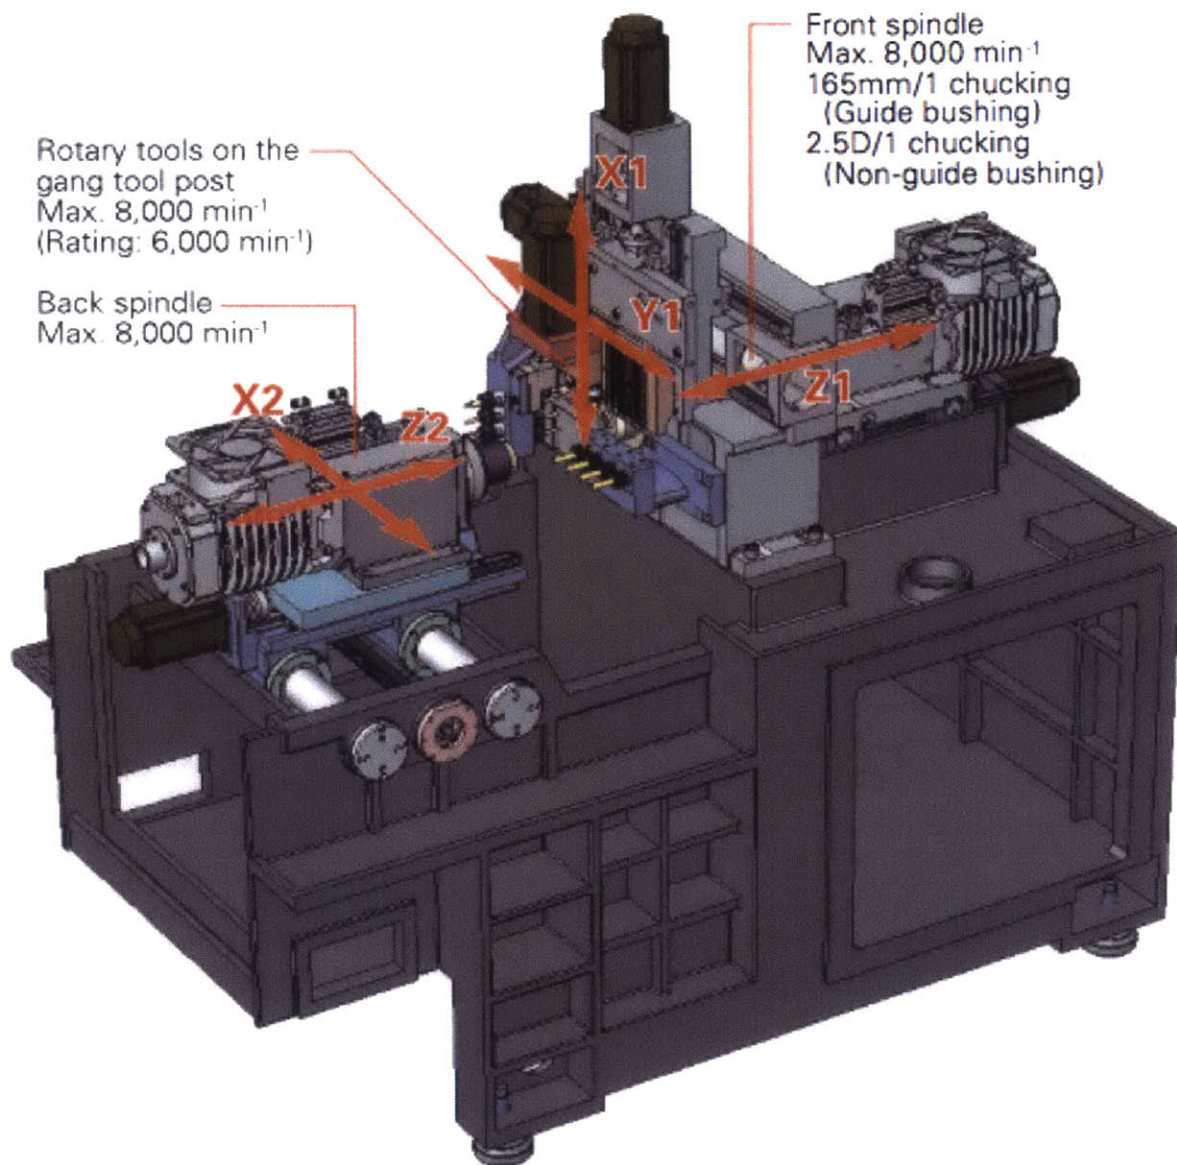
5 Axes layout of the Citizen A20 CNC machine [13].
